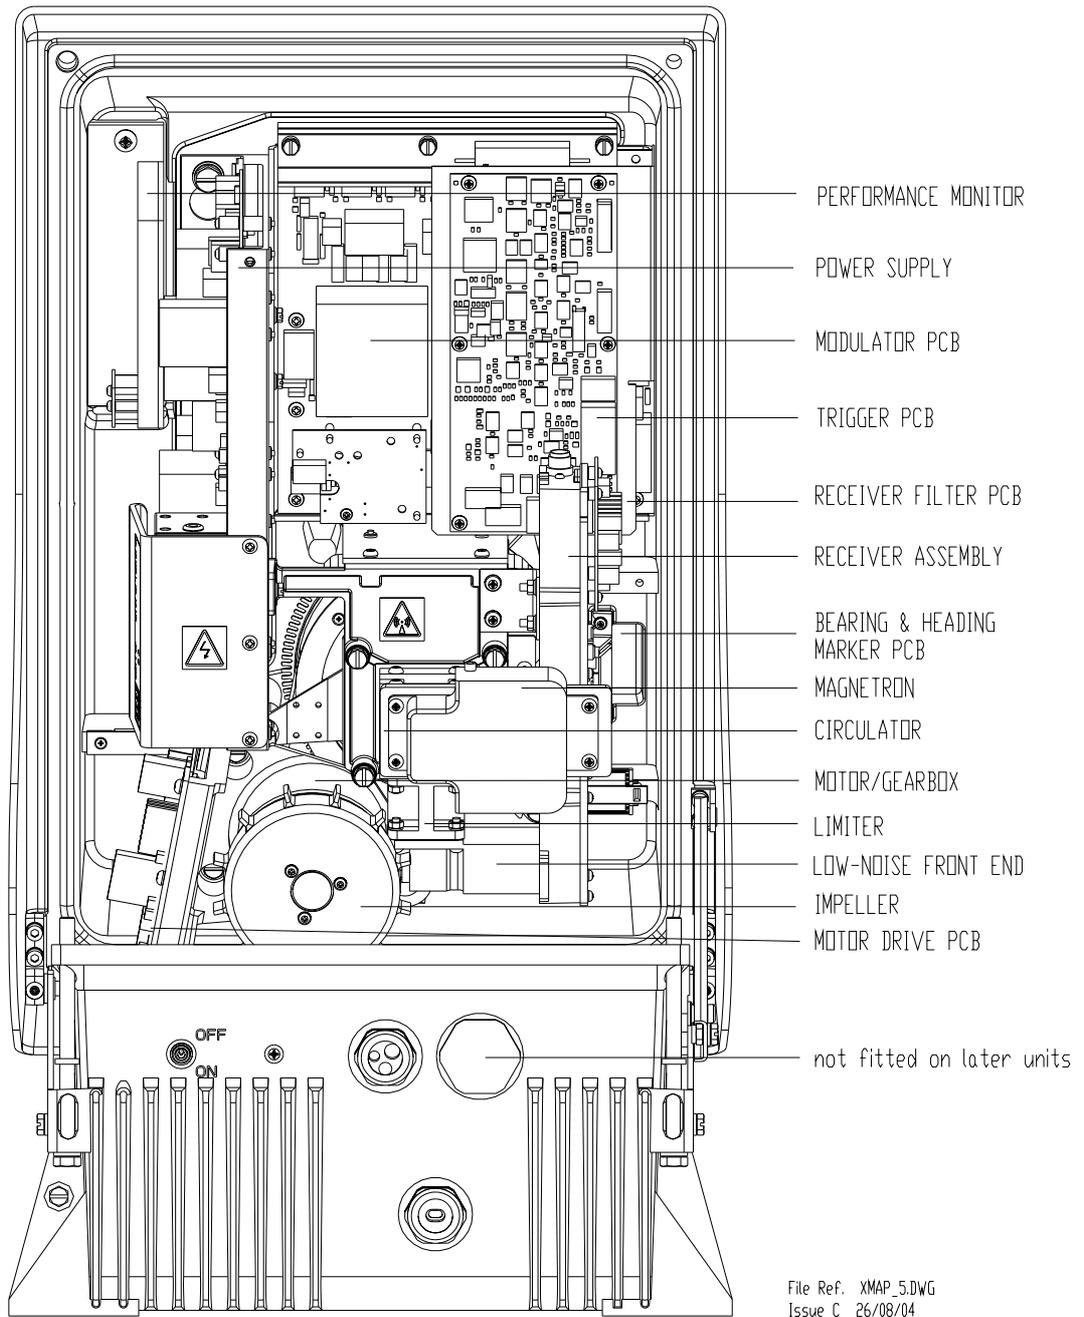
X-Band Masthead Turning Unit – View showing Main Assemblies
